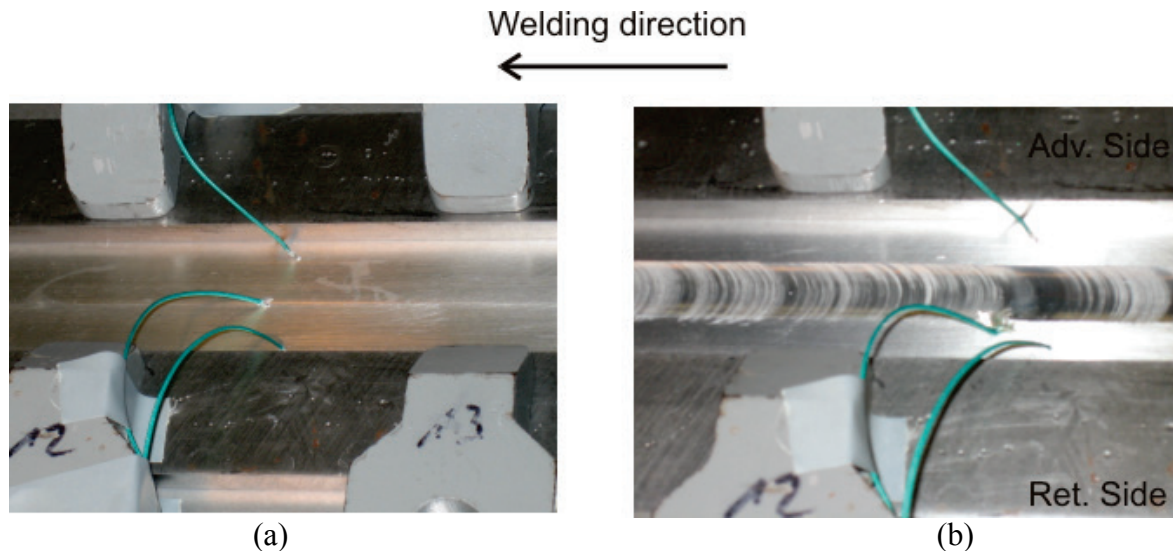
Arrangement of thermocouples to record FSW thermal cycle (a) before and (b) after welding
